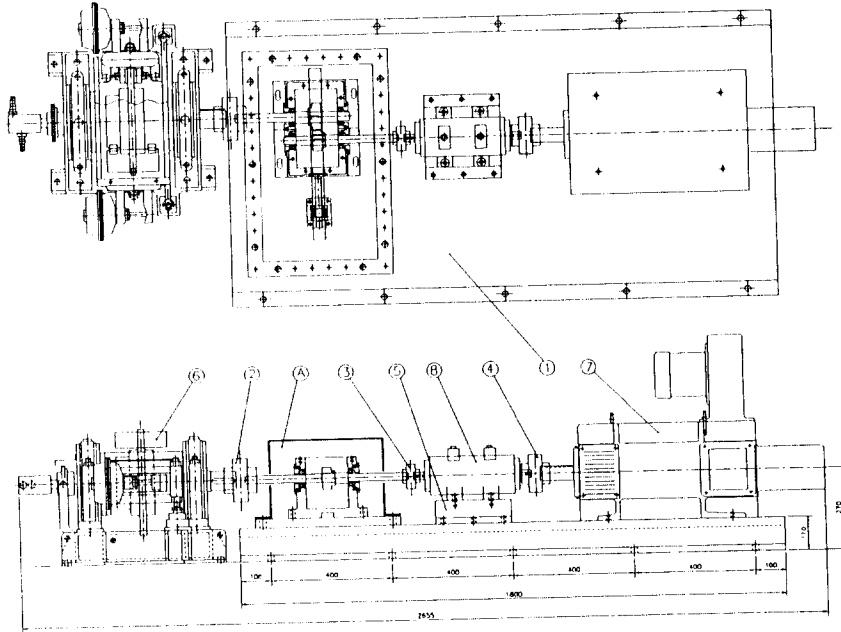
A schematic view of the dynamo-tester of test gears (A, Test part ; ①, Base plate; ②, Coupling 1; ③, Coupling 2; ④, Coupling 3; ⑤, Torque detector base; ⑥, Dynamometer; ⑦, DC motor; ⑧, Torque detector).
